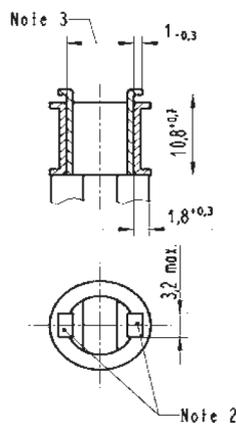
Gauge-piece and hand-key, D-type, Sizes D01-D03
